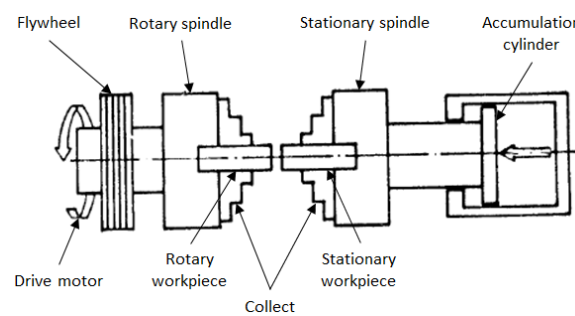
Schematic diagram of a typical inertia friction welding machine (Kearns, 1980).
